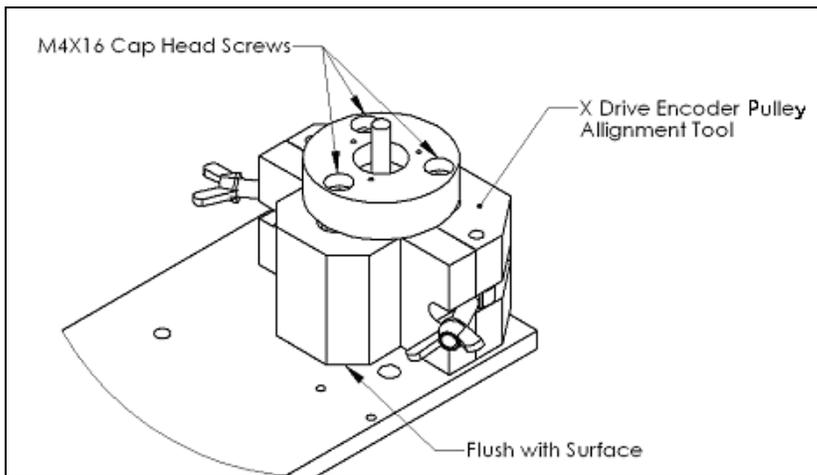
Positioning the Alignment Fixture Around the Pulley Assembly
